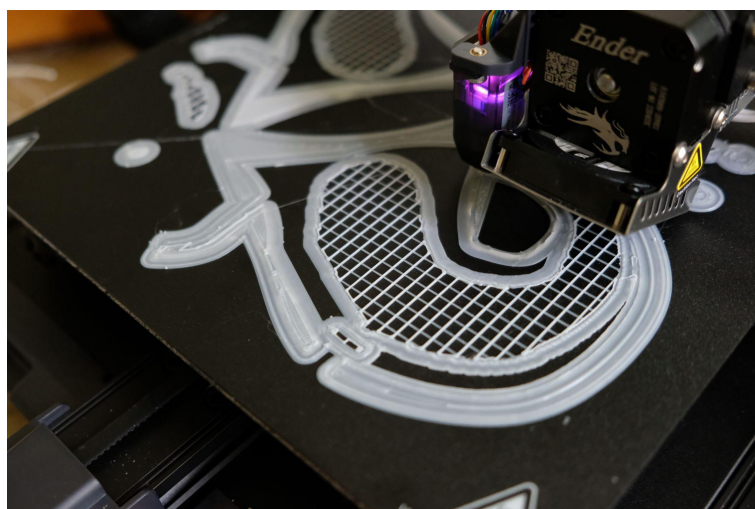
Promising beginnings of a failed initial design. Early 3D print tests.
